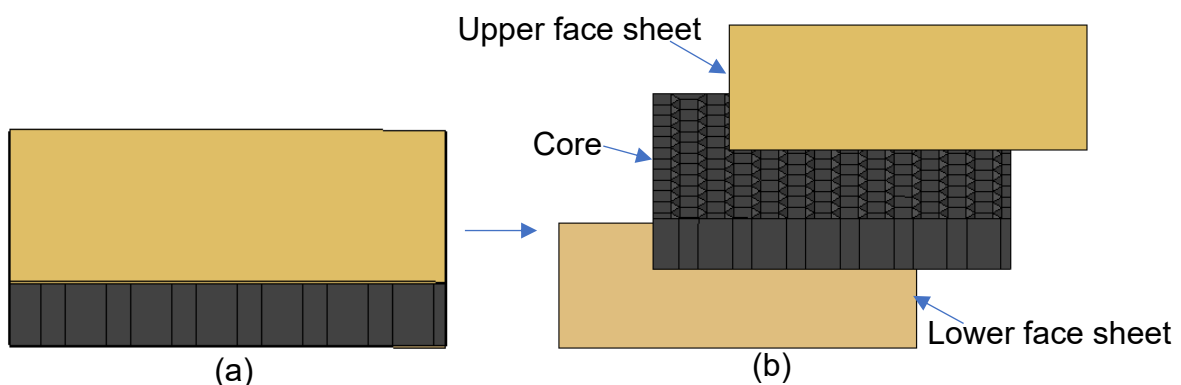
(a) A sandwich panel consisting of (b) upper and lower face sheets and core.
